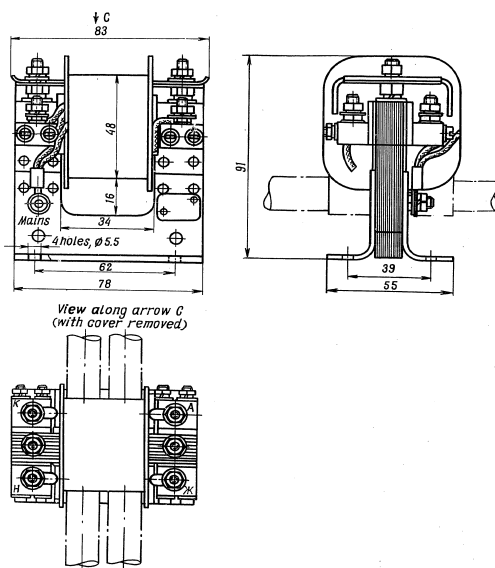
Overall and Installation Dimensions of TC-9AM-12 Transformer
